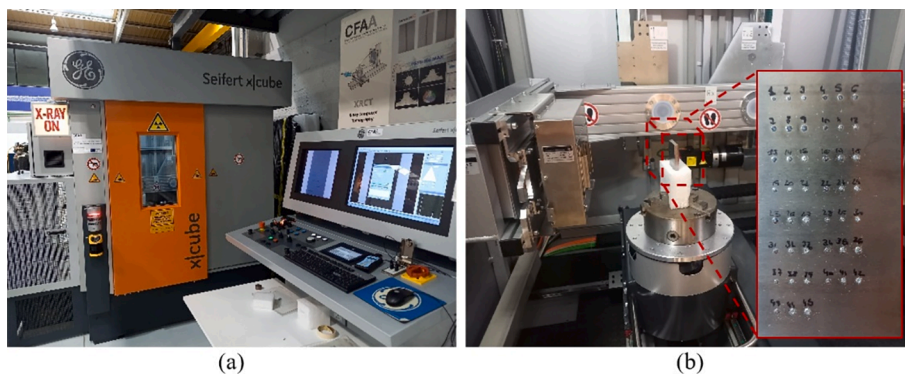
Set-up for X-ray inspection and Computed Tomography. (a) X-Cube machine. (b) Positioning of the single pulse test part.
